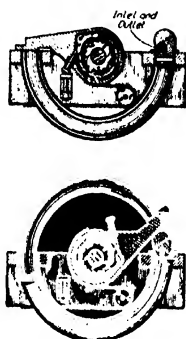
Crescent Air Crank for Marine or Automobile Motor—Top View Showing Normal Position of Crank; Lower View Showing Action of Device in Cranking Motor.
